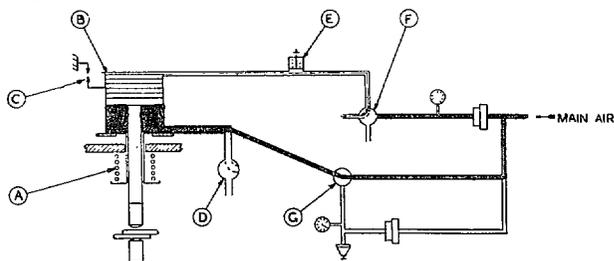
Diagram showing operation of spot welding machine sequence of pneumatic cycle.
